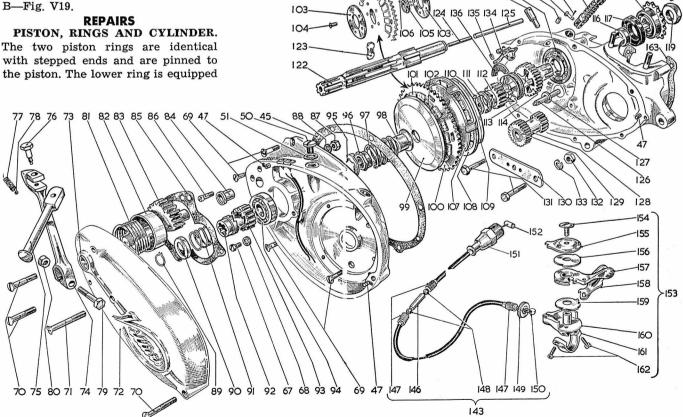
Exploded view of clutch and transmission used on Mark 4F, 6F and 9F.
